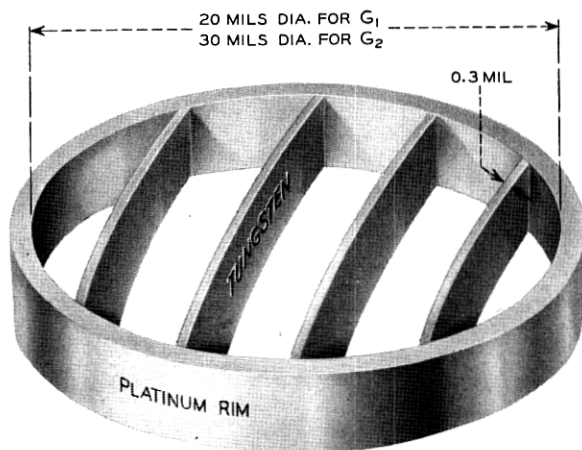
Sketch showing basic configuration of grid used in final version of M1805. The tungsten vanes, which present a thickness of 0.3 mil to the electron stream but are 3 to 4 mil deep parallel to the electron flow, are butt-brazed into the outer platinum rim. Their initial curvature serves to define the direction of expansion during operation at elevated temperatures.
